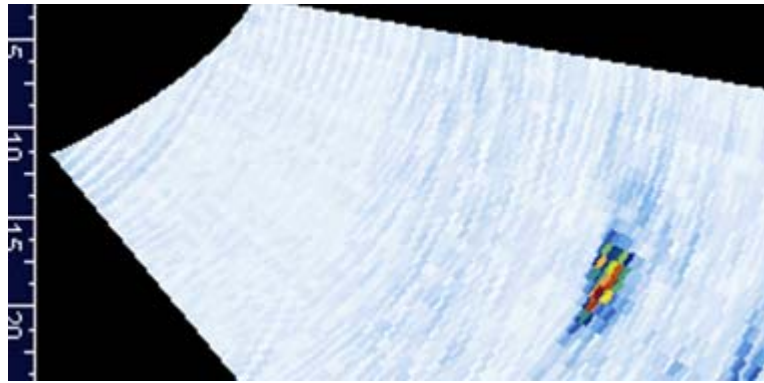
S-scan of 1.5 height notch in austenitic weld Du300 weld test block. Operation PA frequency 5 MHz.
